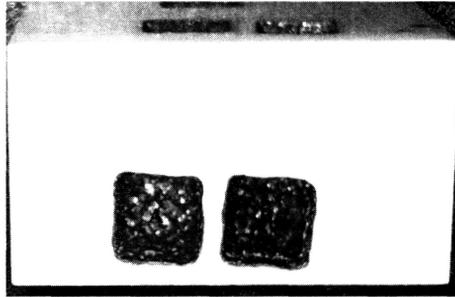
Three millimetres square sized cavities on ZrO₂ ceramic workpiece machined by EDM using adhesive Cu foil as AE and Cu tool electrode with -ve polarity in (A) kerosene (B) EDM oil dielectric
